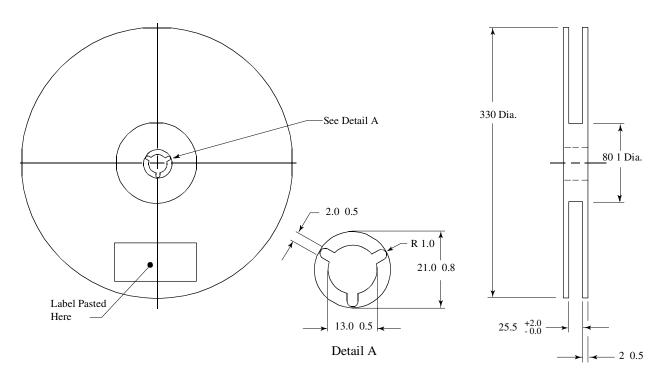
ZHX1000 Reel Dimensions (Unit: mm)
